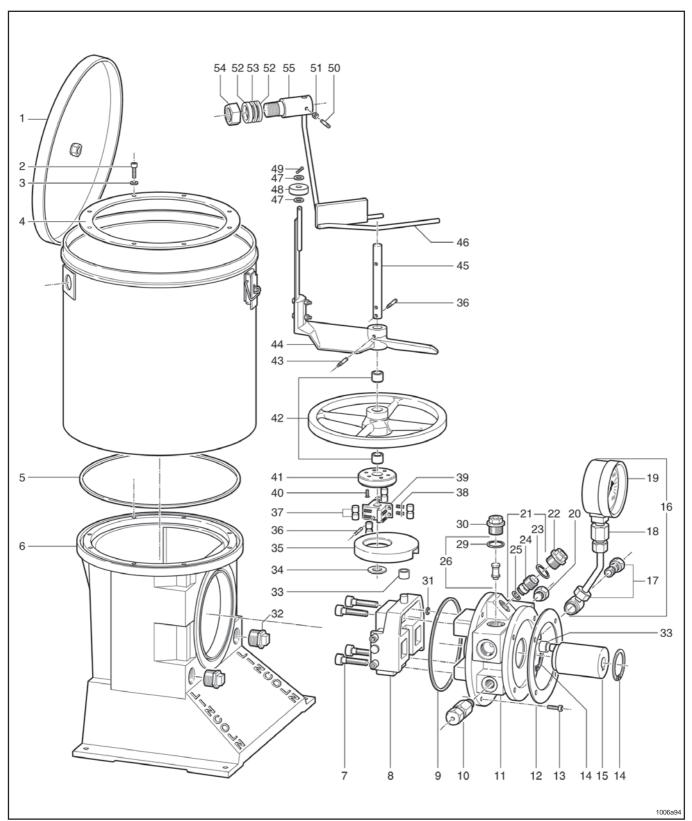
Central lubrication pump ZPU 08/14/24 without drive assemblies
